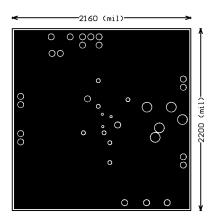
Recommended YZR PCB Layout: Bottom Layer
